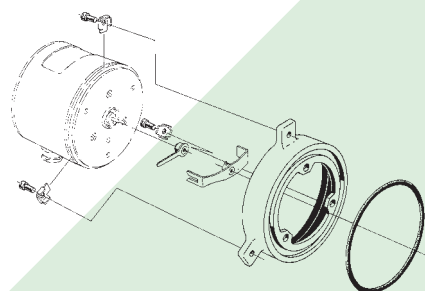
Accessory kit for pressure gauge mounting (see "Feature 12")
